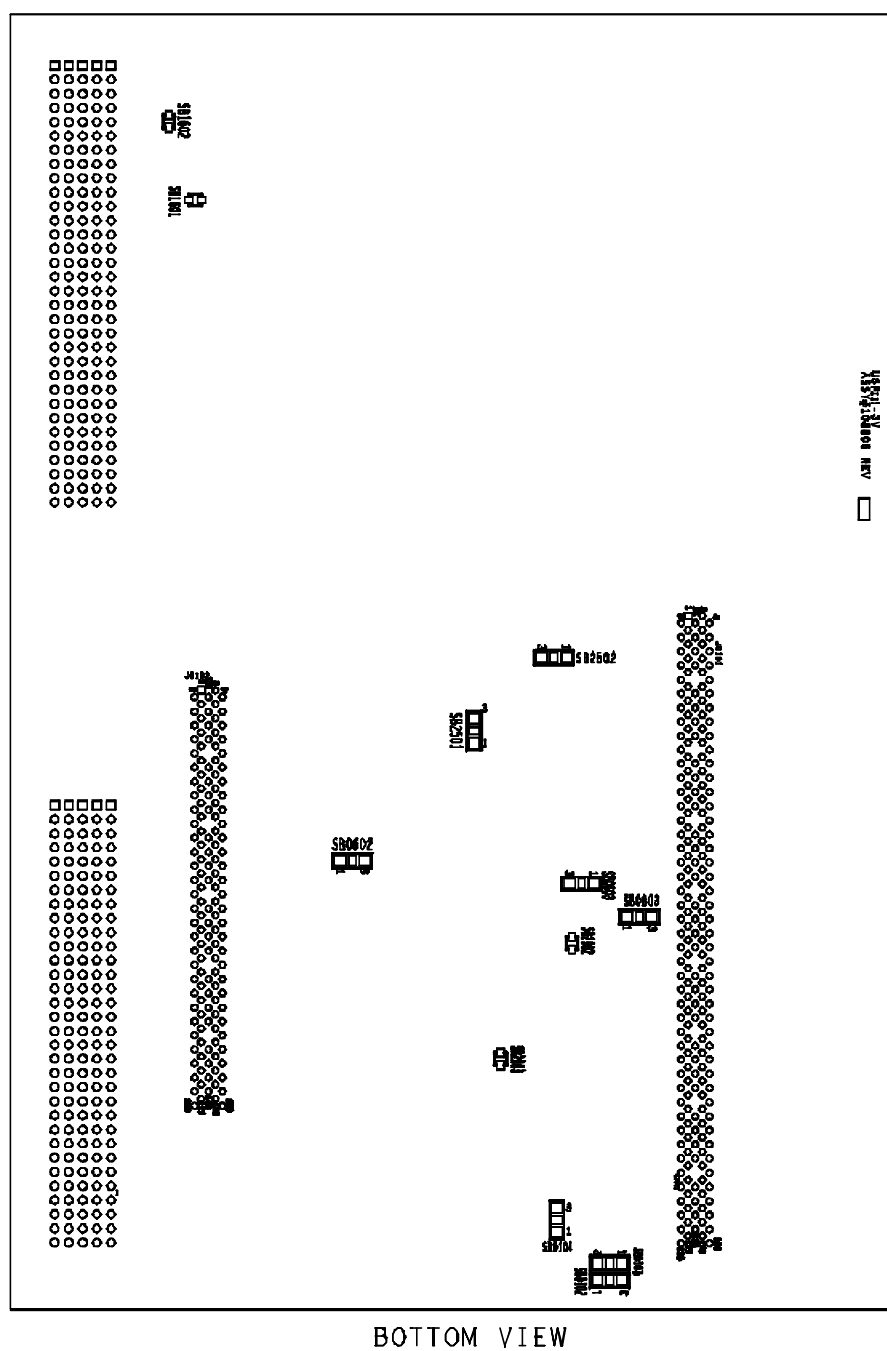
USPII/-3v Baseboard with Solder Bead Locations
